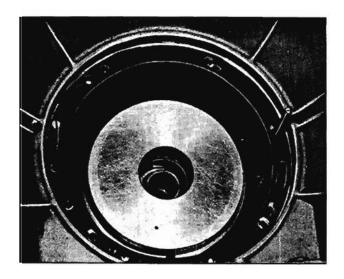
Installing Oil Pump Gasket and Guide Pins
